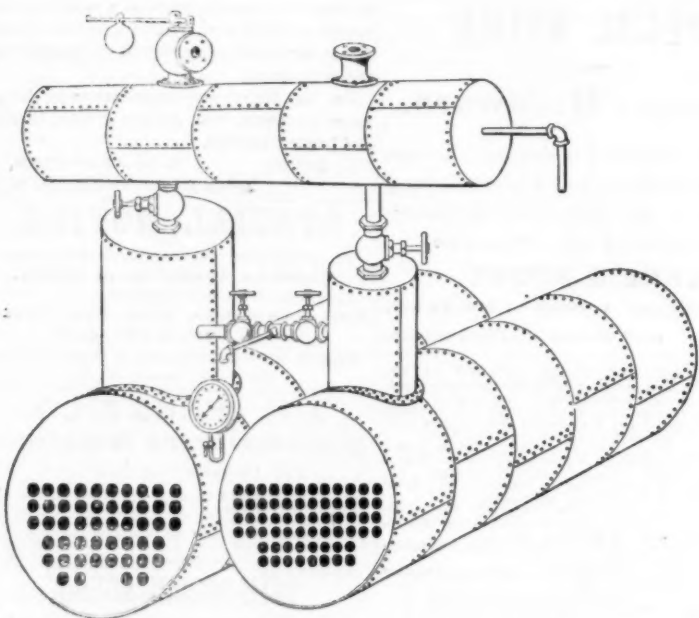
Defective Setting—no Gauge on the Exploded Boiler.
